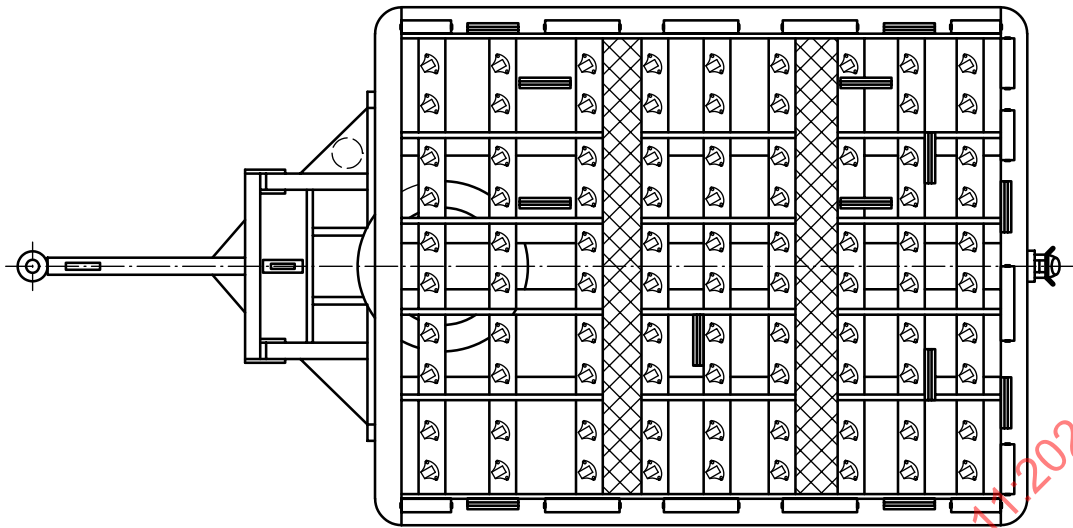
Container/pallet dolly, end towing side/end transfer
